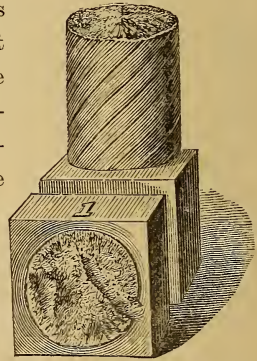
is a sketch of specimen No. 1, and shows its somewhat granular fracture, and the seamy structure produced by a defective method of working. Fig. 6, from specimen No. 16, more nearly resembles
